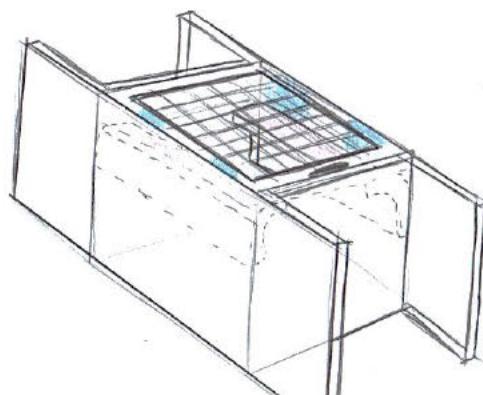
, KNIVES ASSEMBLED INSIDE INNER BOX
